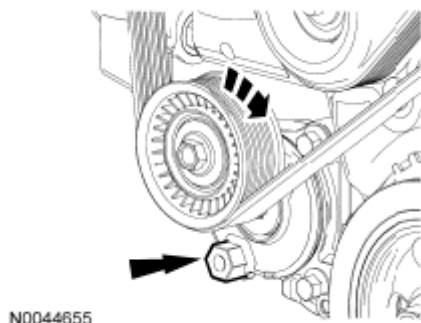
Rotating Accessory Drive Belt Tensioner Clockwise
